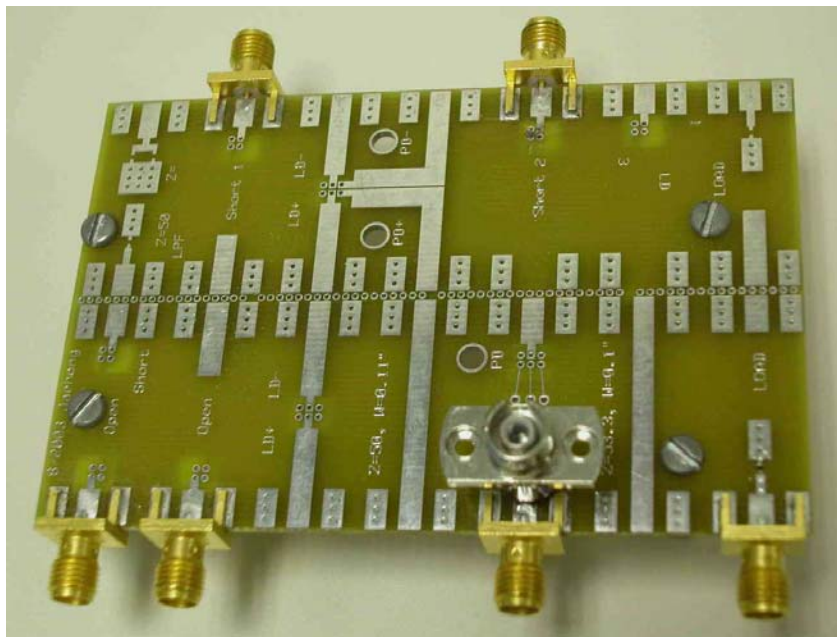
The fabricated 2.5 Gbit/s laser diode mounted on the printed circuit board.
